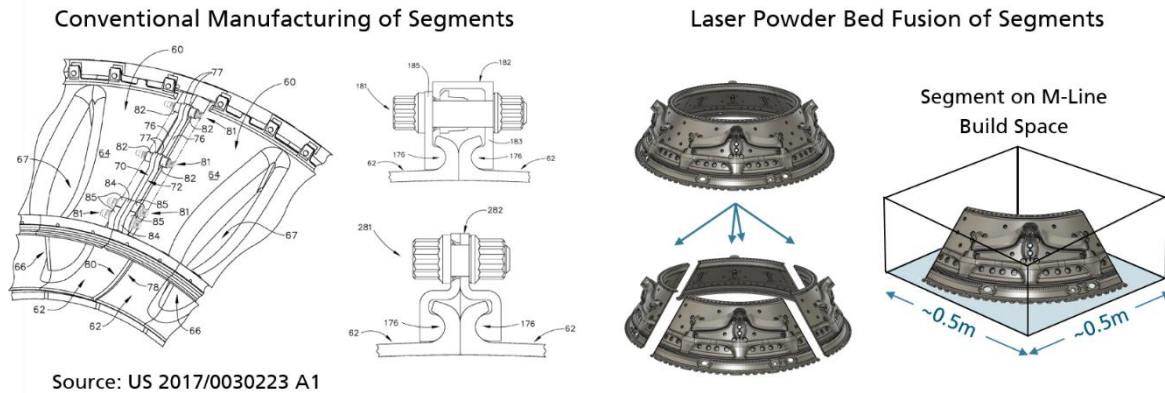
Concept for Additive Manufacturing of Segments and Assembly.
